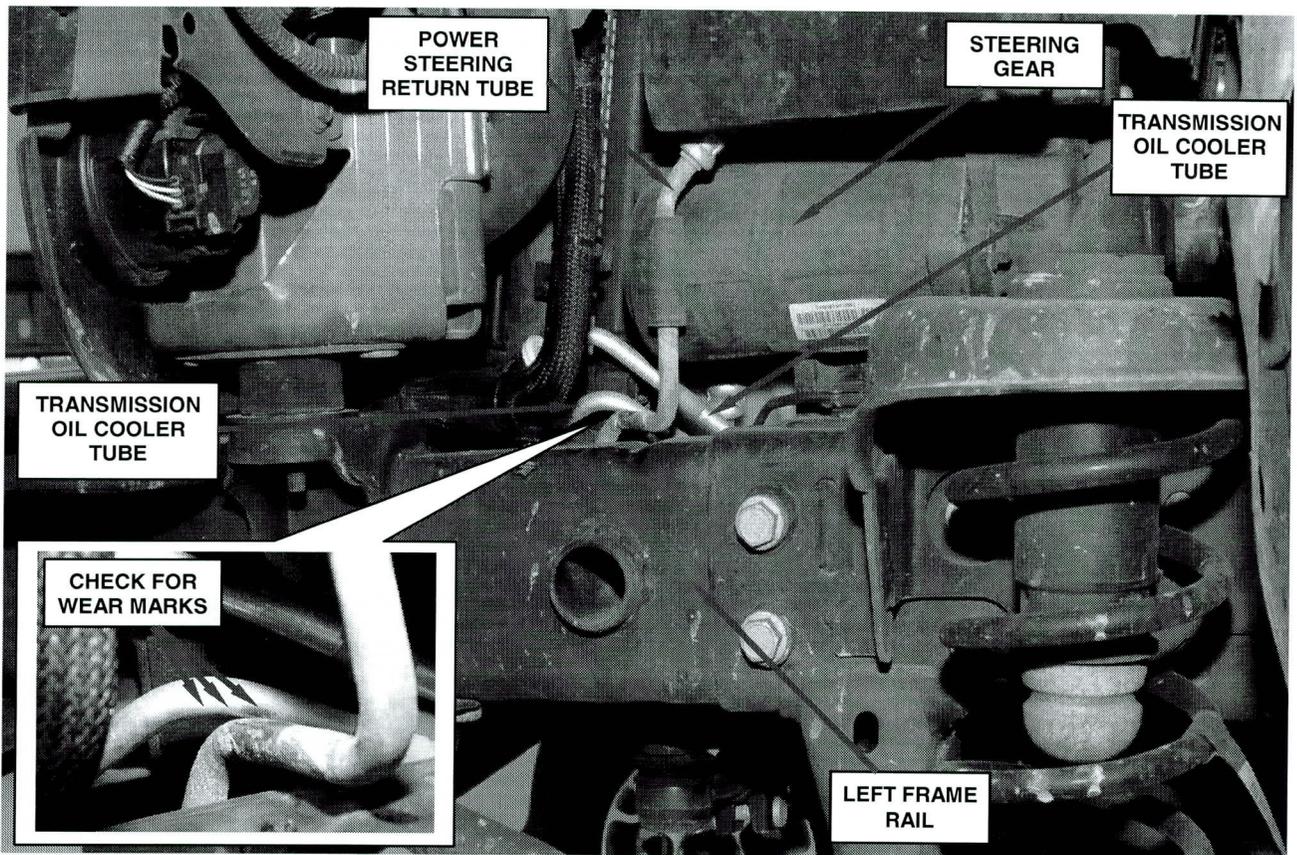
Remove Rubber Power Steering Return Tube Cover
